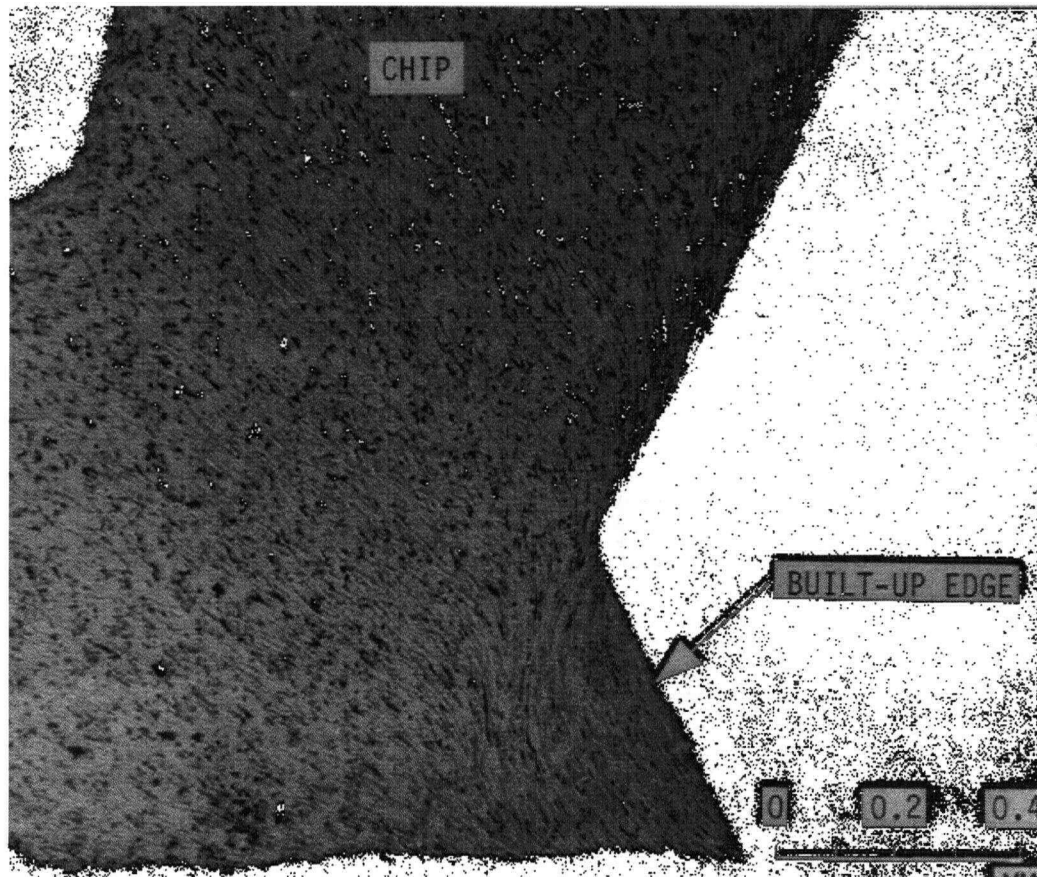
Cross-section of the end of planer chip cutting with SWC tool [15]
